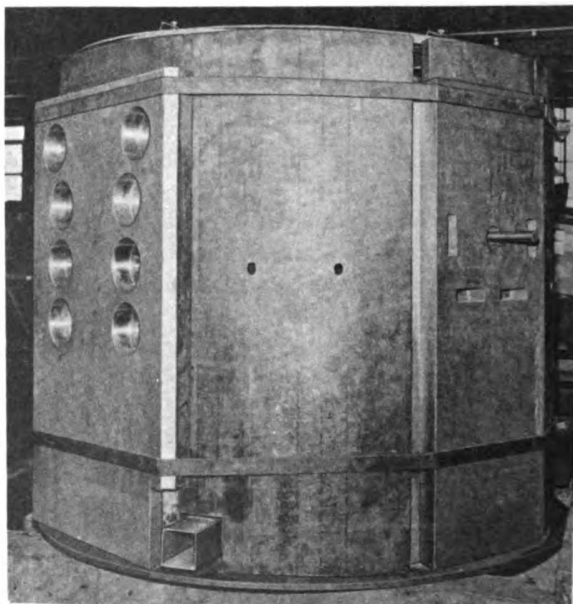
Assembled reflector tank with lead shielding in place.
